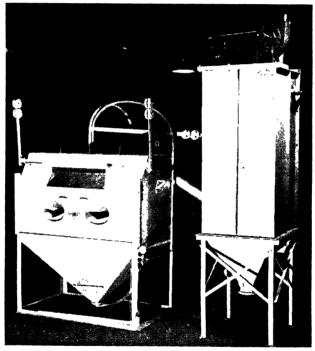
Sand blasting equipment (Courtesy of: Ruemelin Mfg. Company)
